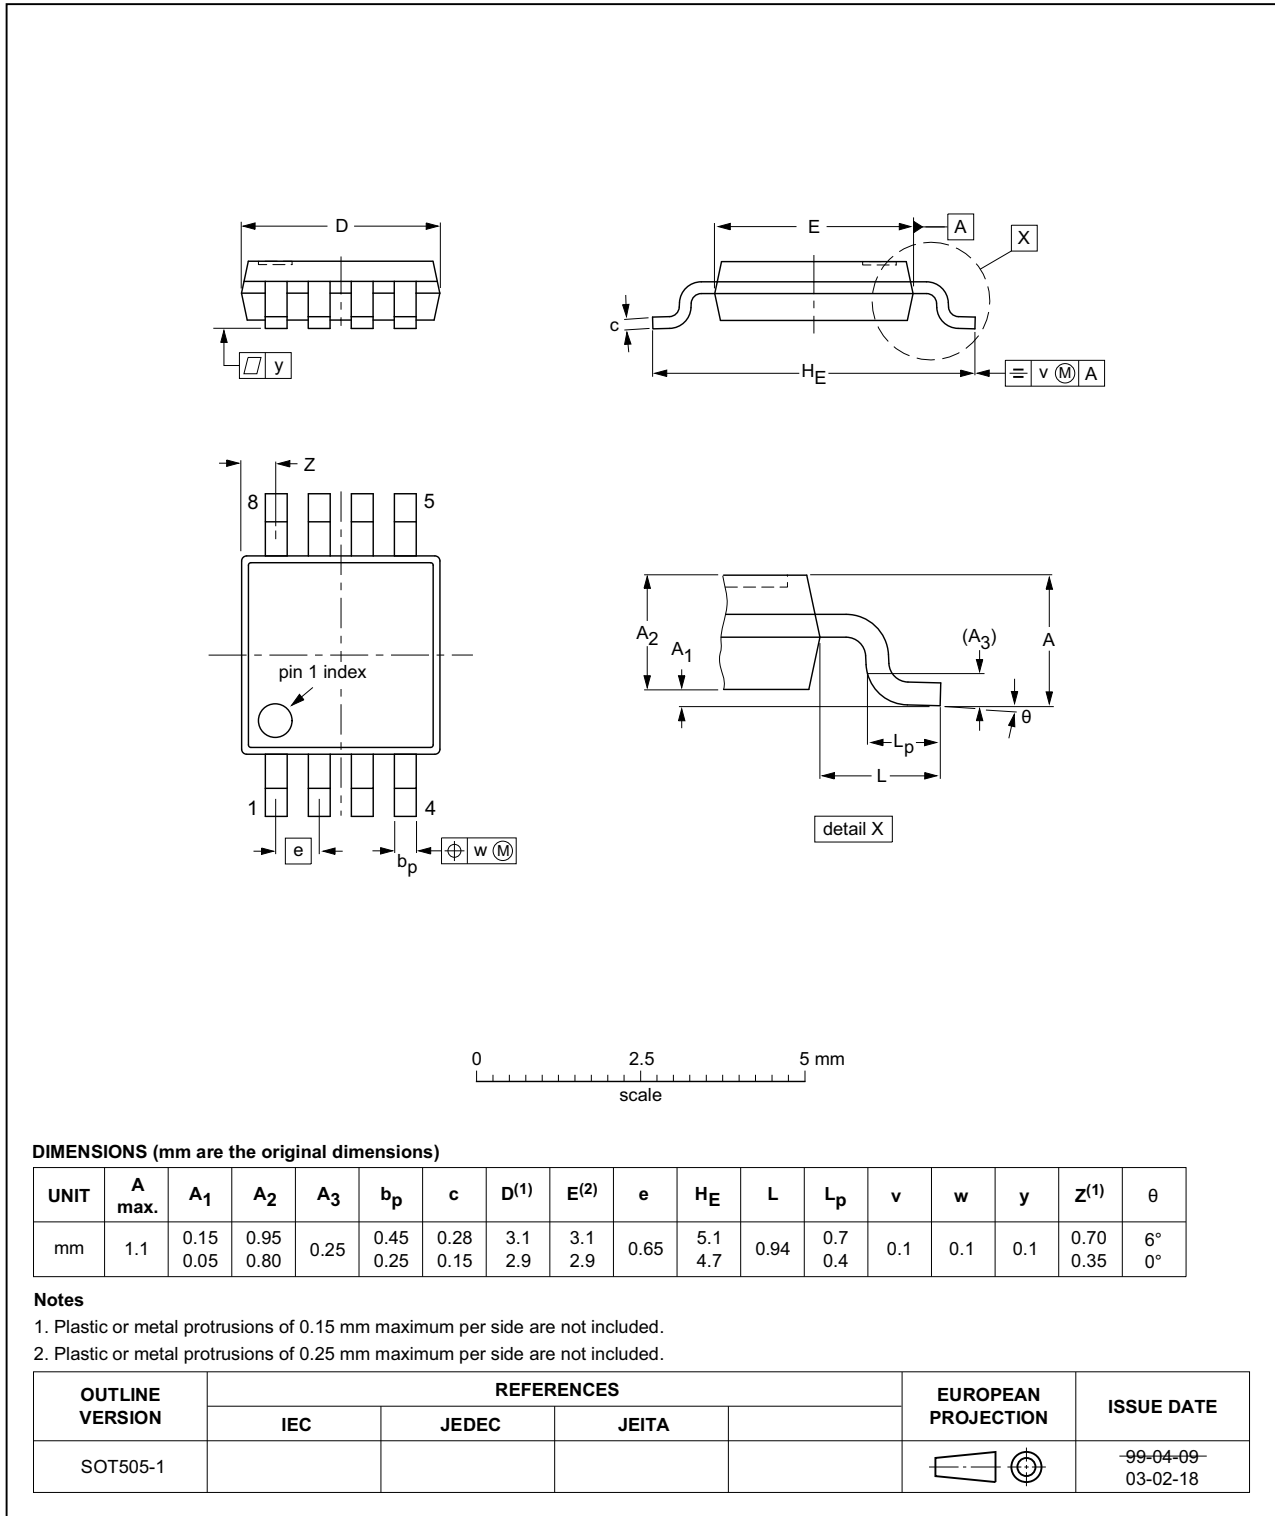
Package outline SOT505-1 (TSSOP8) of PCF85063ATT
